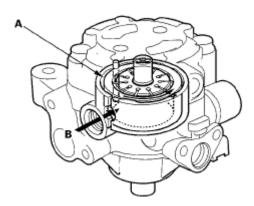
Pushing In Cam Ring From Pump Housing Cap Hole Courtesy of AMERICAN HONDA MOTOR CO., INC.
